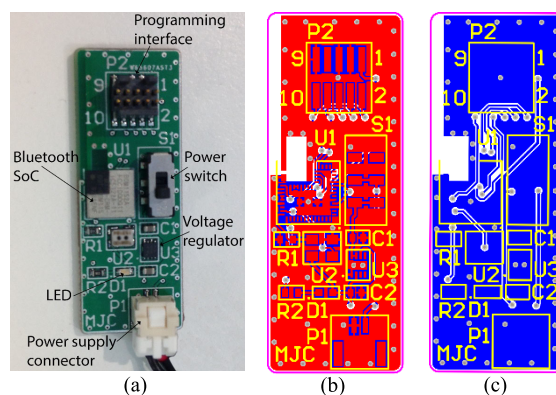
a) Photo of Bluetooth system PCB b) Top layer schematic of PCB c) Bottom layer schematic of PCB.
